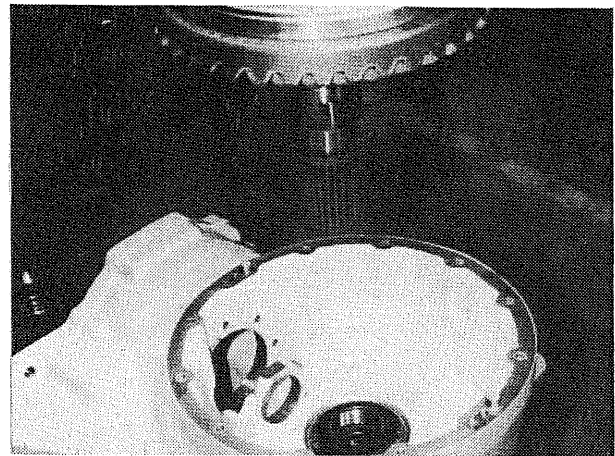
Ring Gear, Pinion and Drum Shaft (2 of 5)
